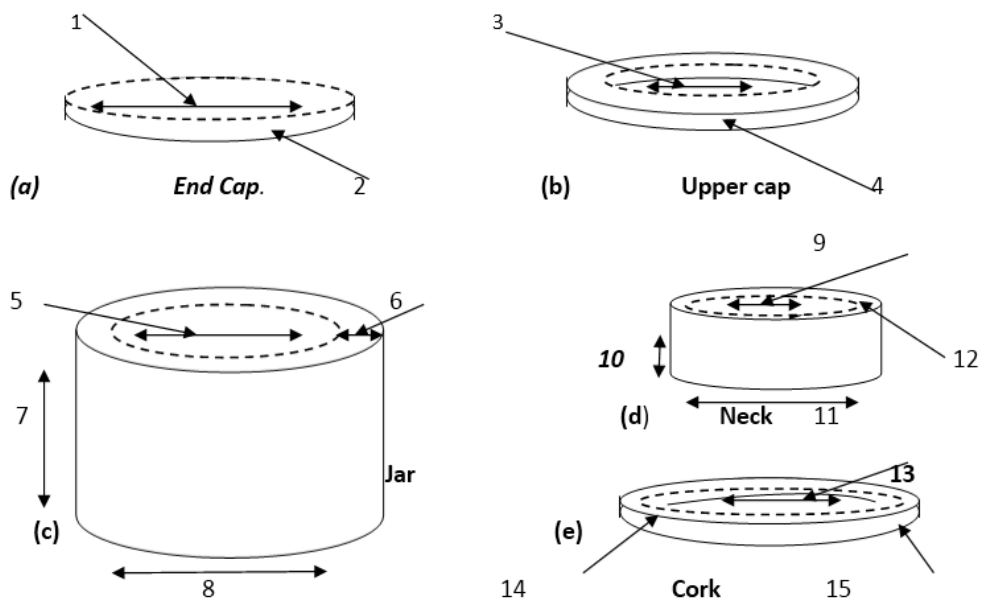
Separate Parts and Dimensions of the Cast Jar.
